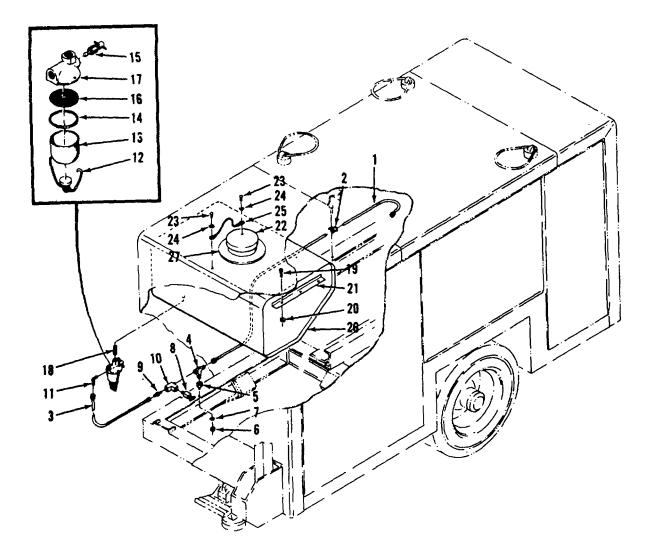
Pneumatic Lines and Fittings - Exploded
